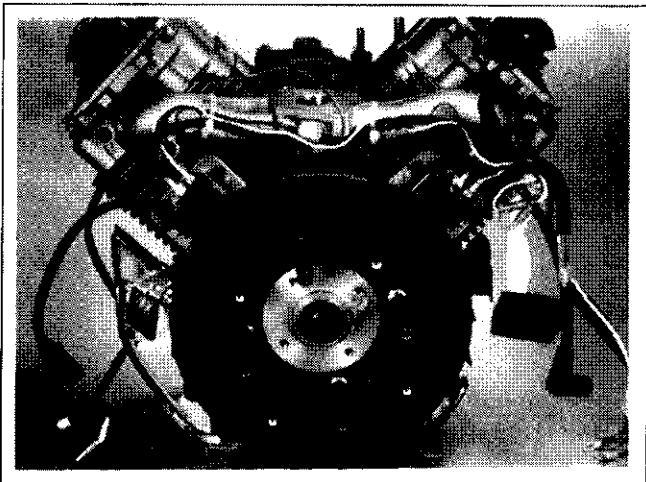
Tighten Intake Manifold to Specified Torque.
